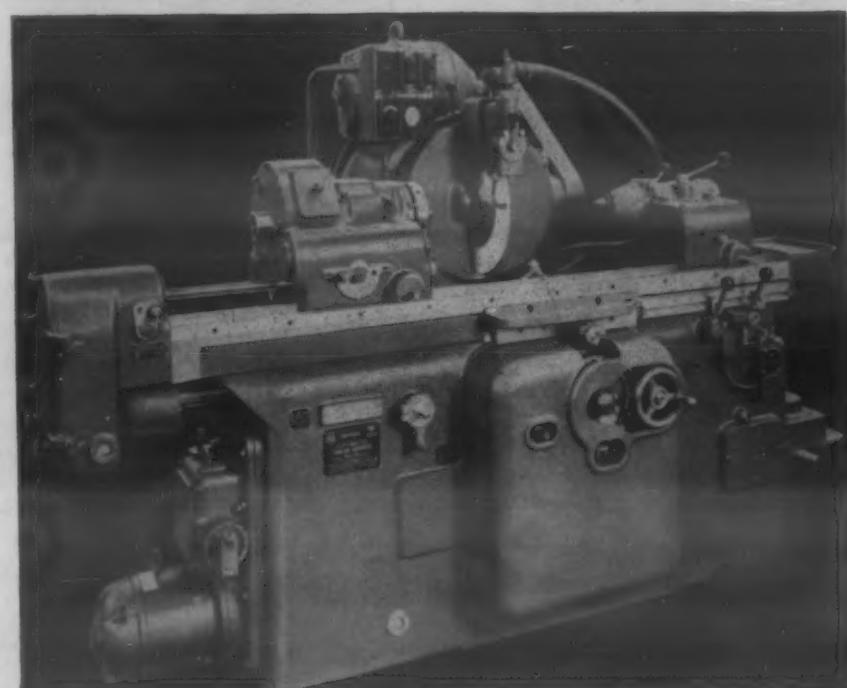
Typical thread grinder (12 x 45) for external work. (Courtesy: Jones & Lamson Machine Co.)
